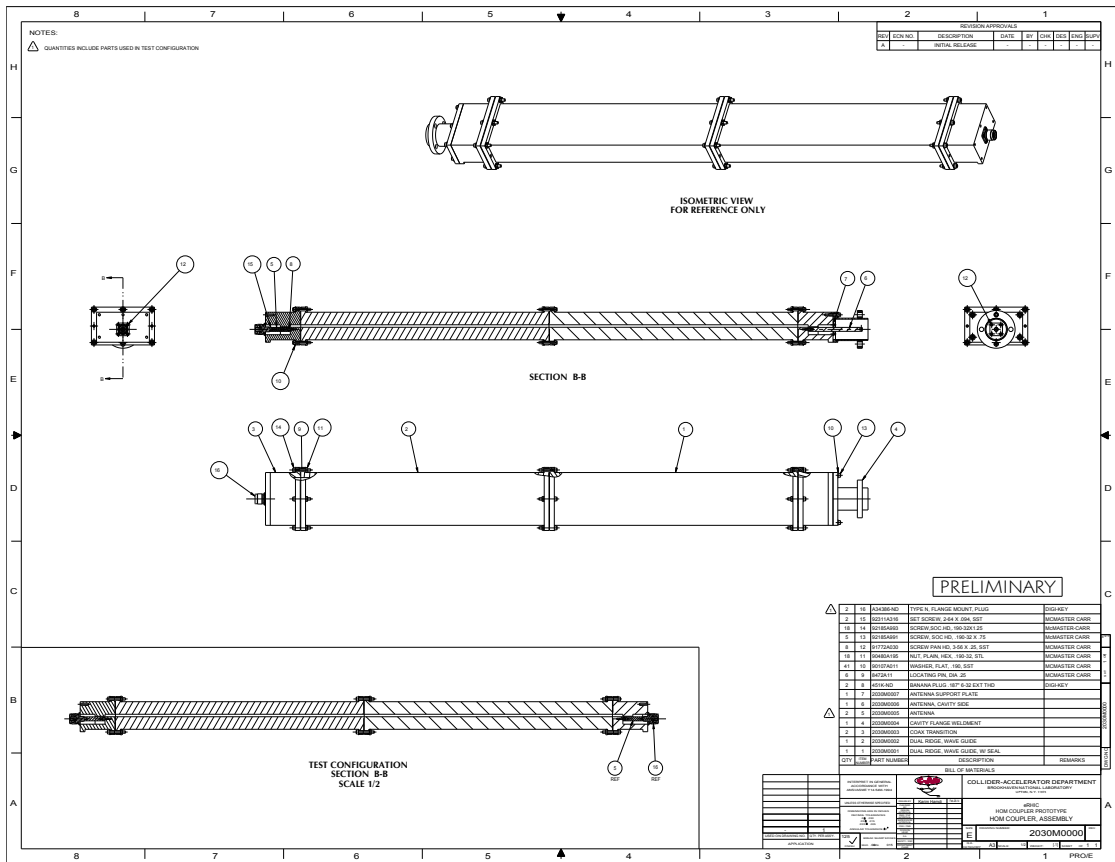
Preliminary mechanical CAD drawing of the HOM coupler prototype assembly.
